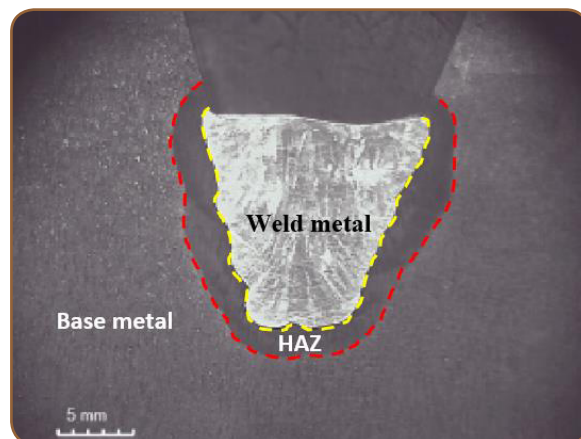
Macrographic image of the weld in the nickel-based filler sample
